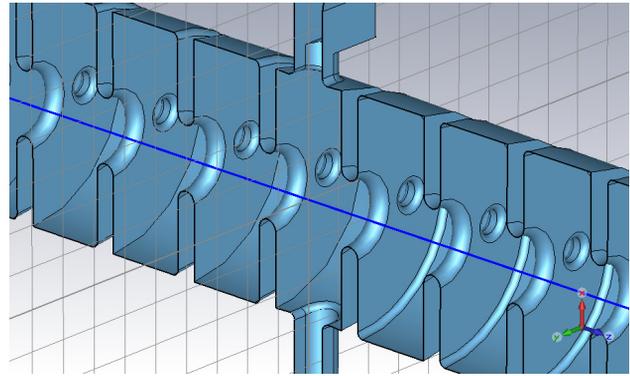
Cut-plane view of the cell-shapes and coupler design.
